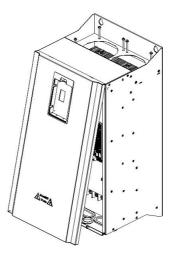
Cover plate installation and disassembly of CT100-4T-15G/18.5P and
